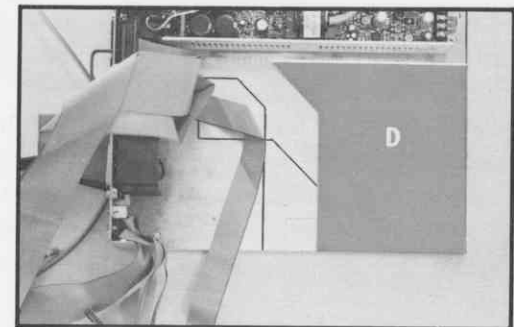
Template D Tracing - Short 1/2" Tape Cable
